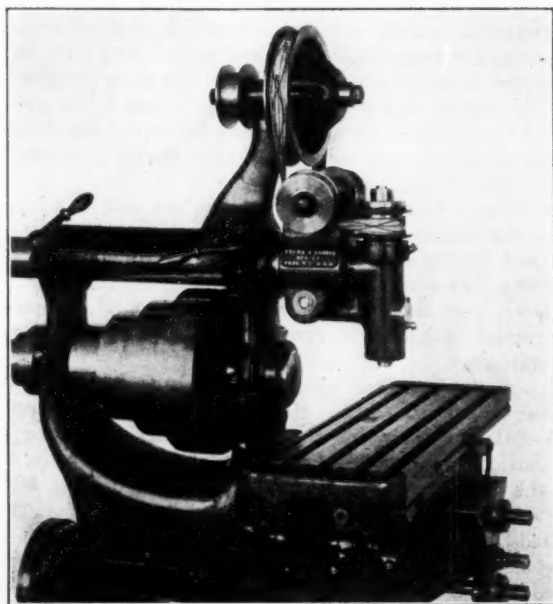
HIGH-SPEED VERTICAL SPINDLE ATTACHMENT FOR USE ON NO. 0 PLAIN MILLING MACHINE
